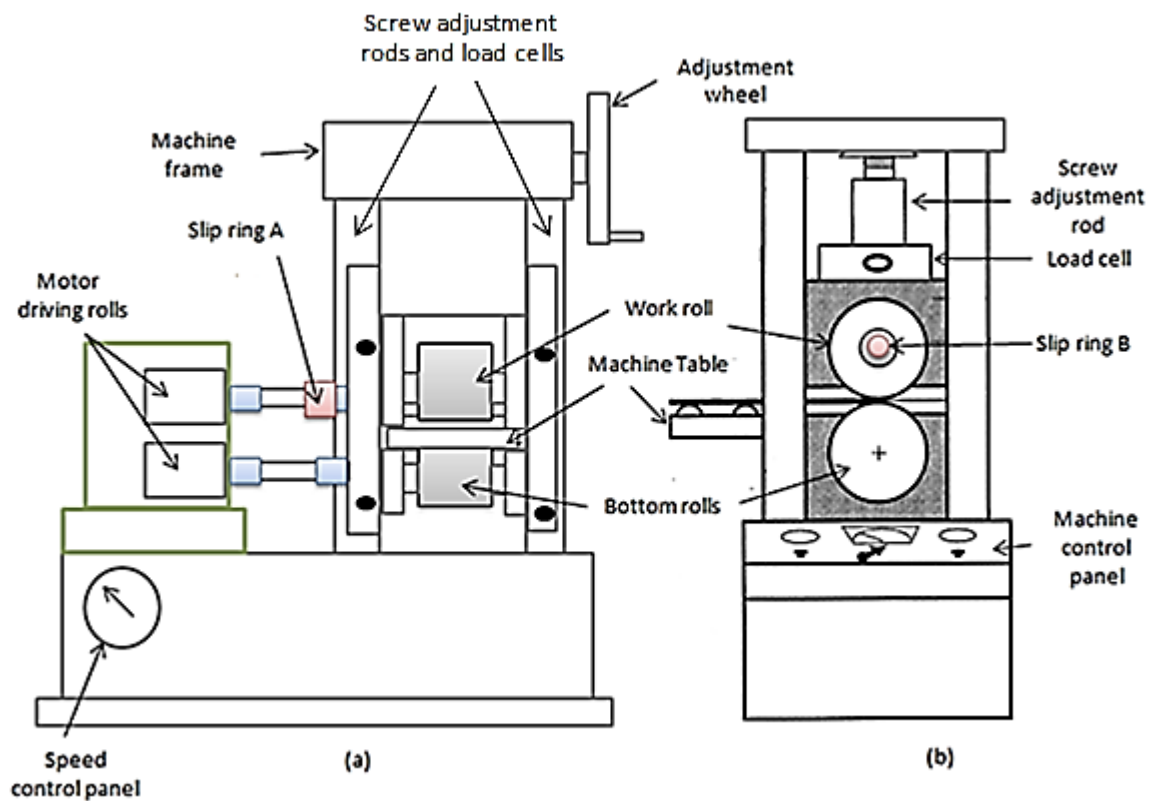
Sketch of (a) front (b) side view of the pilot mill employed
